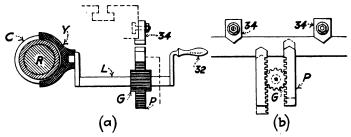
B.—Shows principle of operation of sliding clutch member C in Fig. 153A. The Yoke Y fits freely in the groove in the clutch and is operated by the lever 32 (see also No. 32 Fig. 140). Fastened to the lever shaft L is the gear G that lies between two plungers P which are provided with rack teeth as shown in b. When lever is in a vertical position the clutch C is neutral. When C is moved to engage either bevel gear (Fig. 153A) one plunger is raised and the other is depressed as shown by dotted lines (b, Fig. 153B). As the table feeds and the dog 34 comes against and pushes down the plunger P, it turns the gear G which serves to move the lever L and the yoke Y and thus disengage the clutch.
